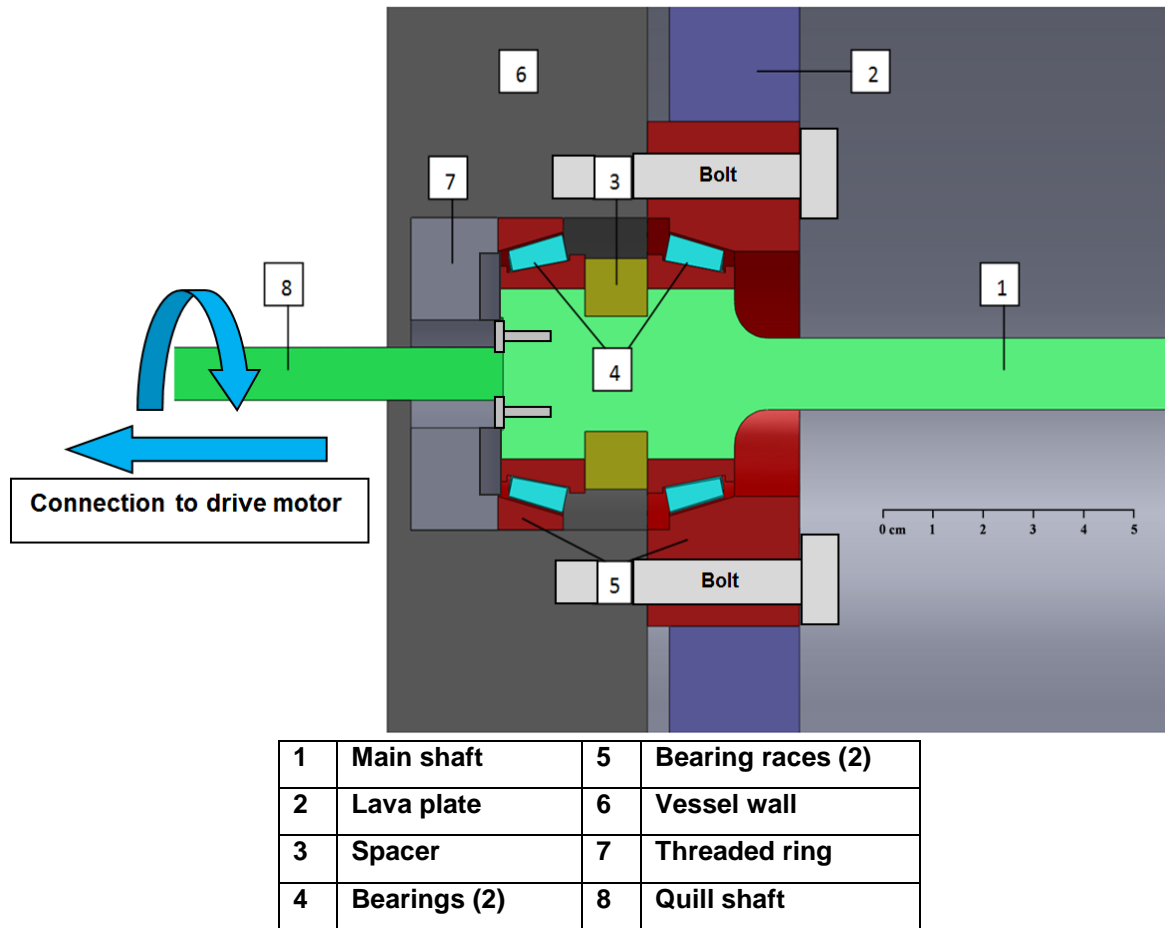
Cross section side view of the tapered roller bearings sustaining the rotor.
